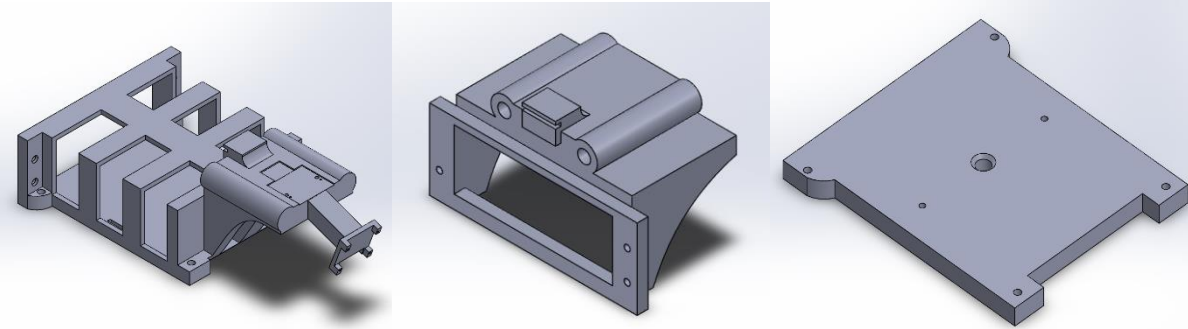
Sensor mount assembly (a) Front subsection which holds batteries, IMU, and RGB camera, (b) back subsection, (c) bottom plate that holds the Velodyne
